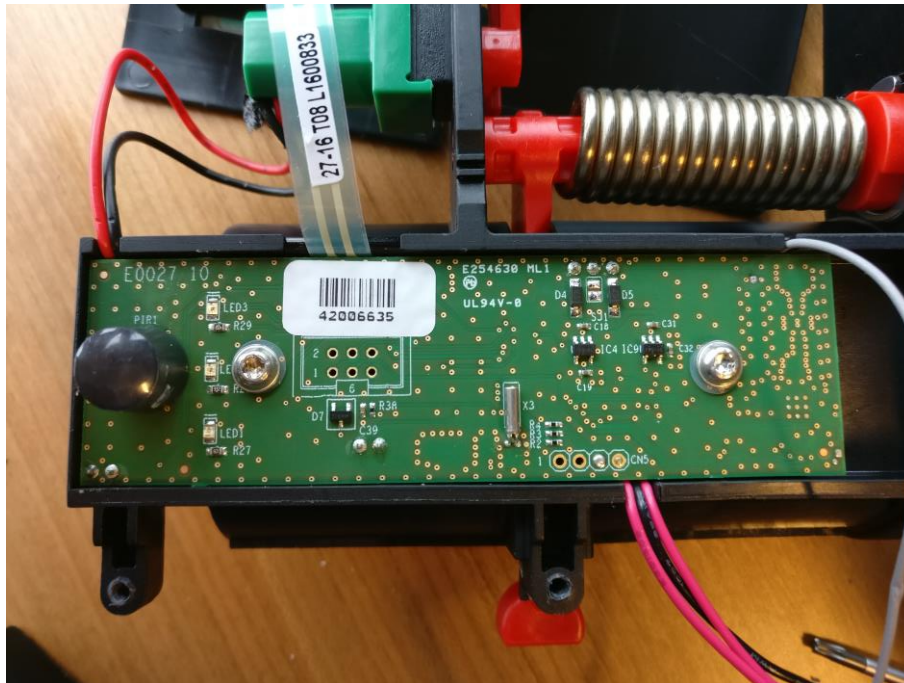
Shows PCB front side, which is placed on the underside of the main trap subassembly.
